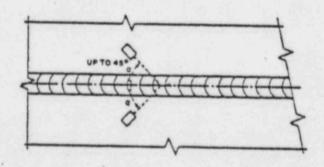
TYPICAL TWO SEARCH UNIT TECH. NIQUE FOR DETECTING TRANSVERSE DISCONTINUTIES IN WELDED JOINTS
